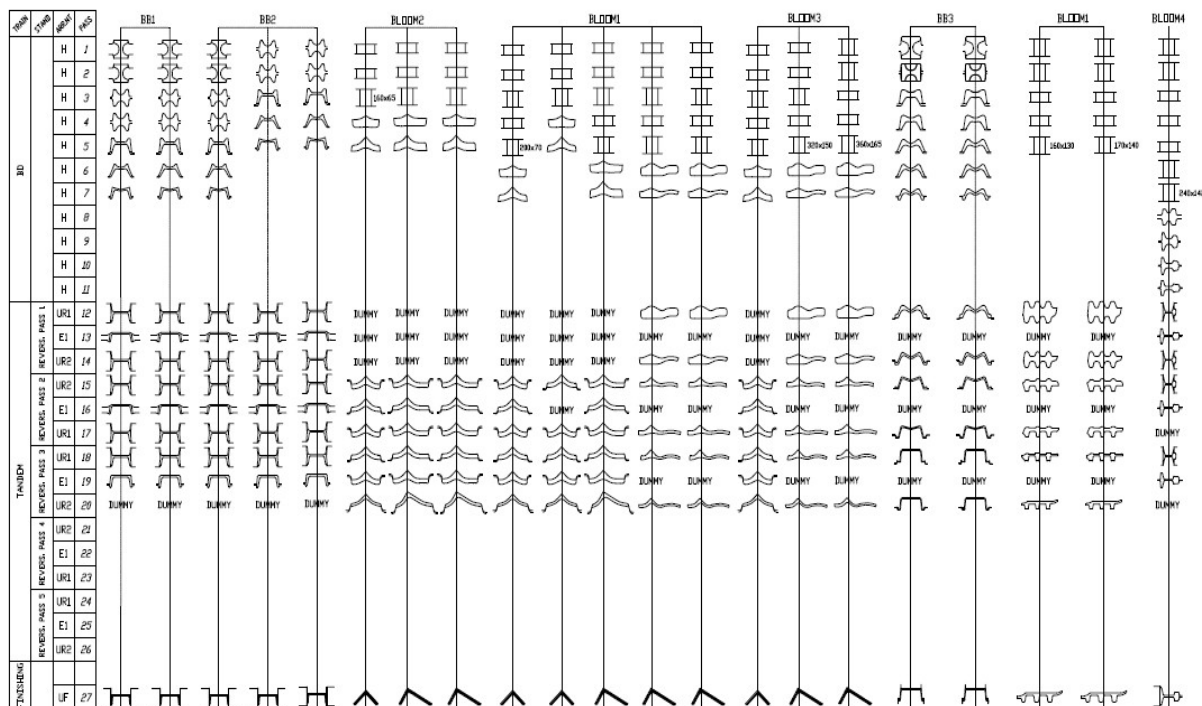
Section and rail pass schedule in the 3+1 universal mill.
